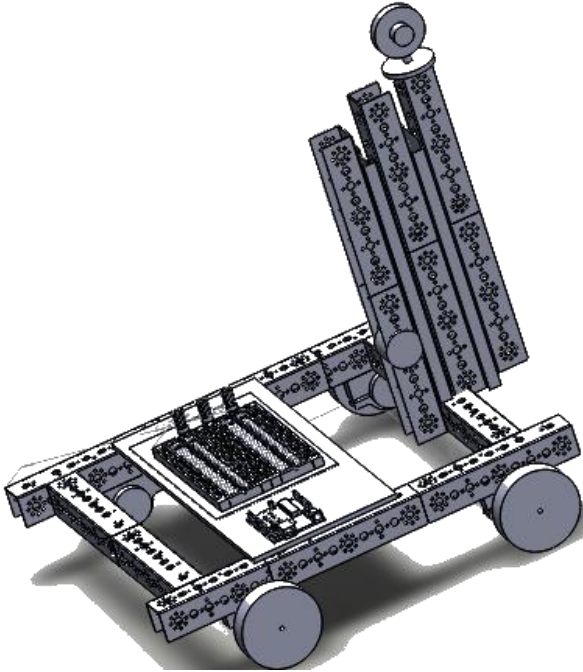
Linear Slide Mechanism implemented in Kiosk (Isometric View)
